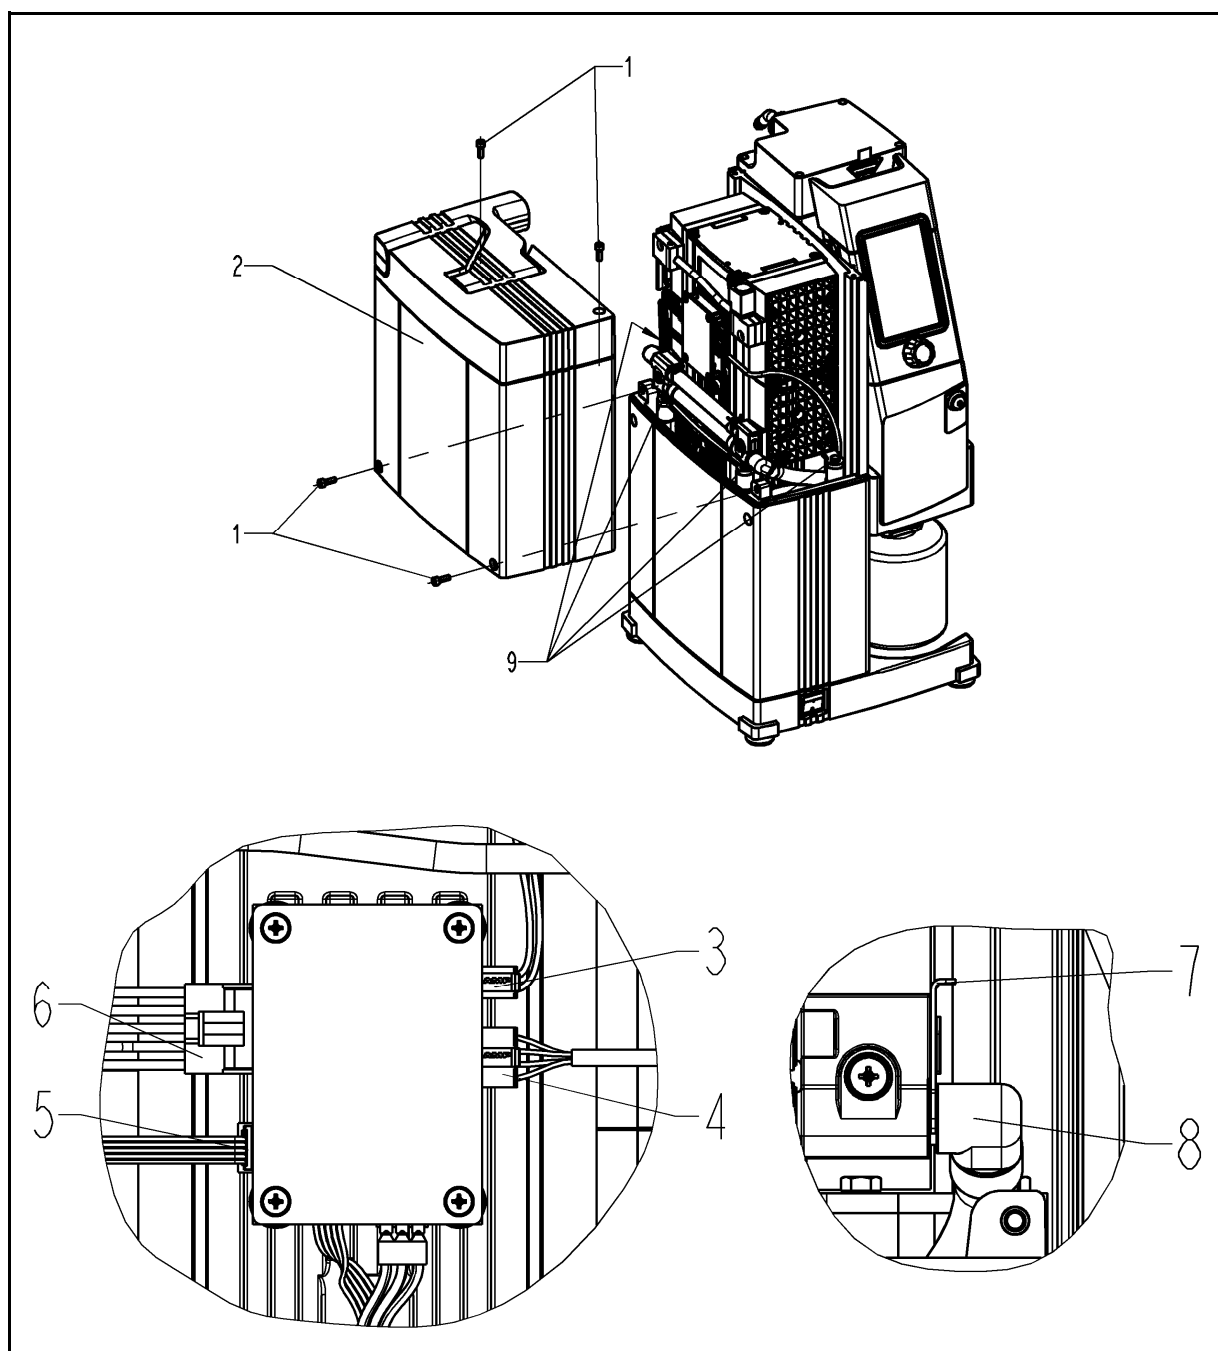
Accessing the pump in the SC950 vacuum pump system
